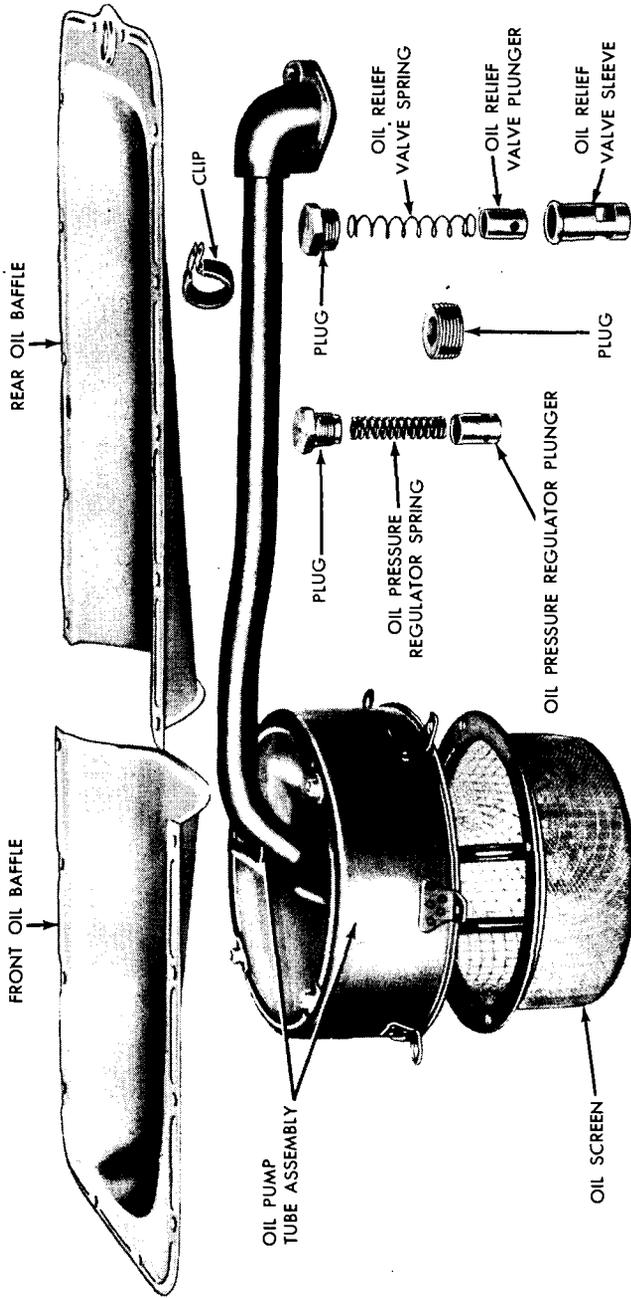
Engine Oil Pan Assembly (Used on Early Type GAA Engines)
